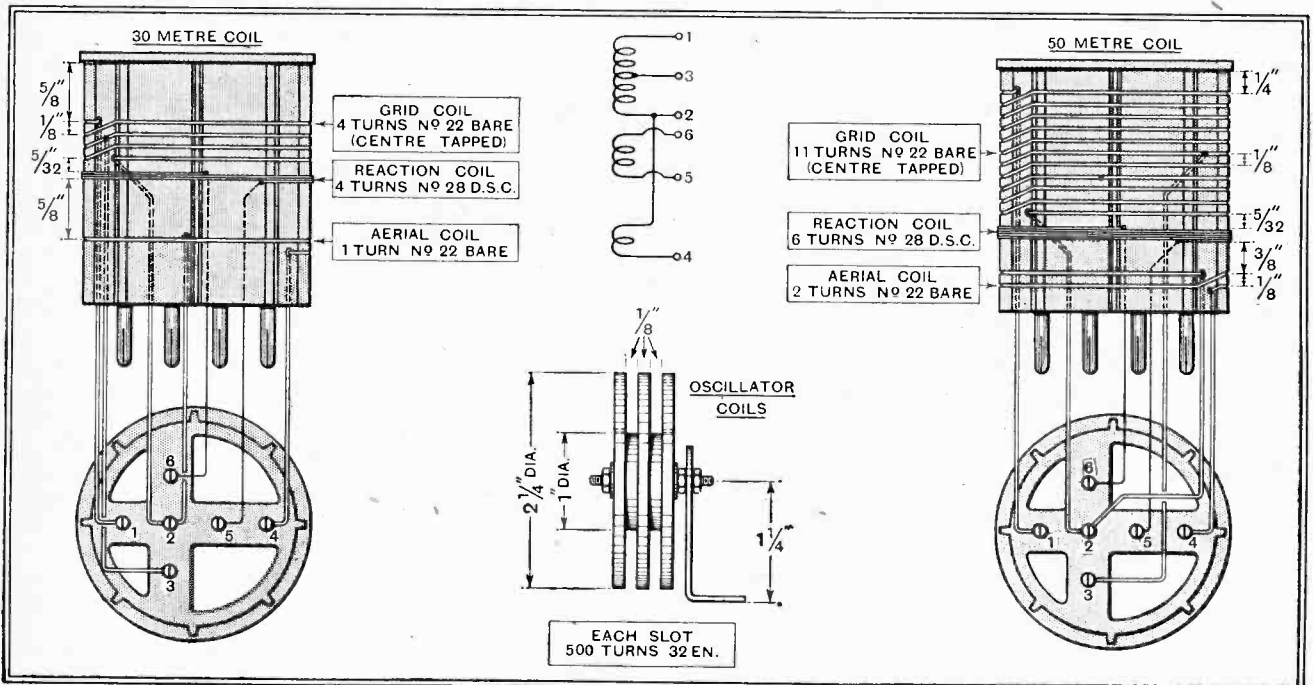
Details of coils and winding data, also dimensional drawing of wooden former for quenching oscillator coils.
